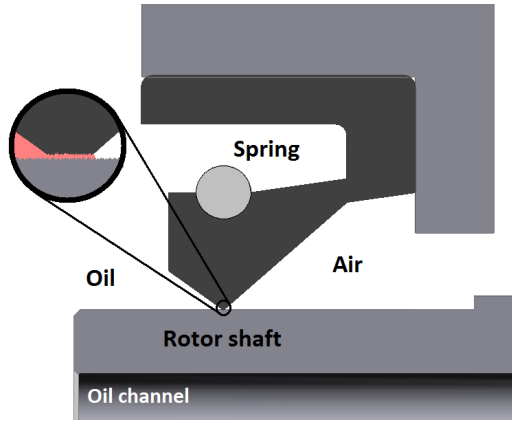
Sketch of an oil seal similar to that mounted in the machine
